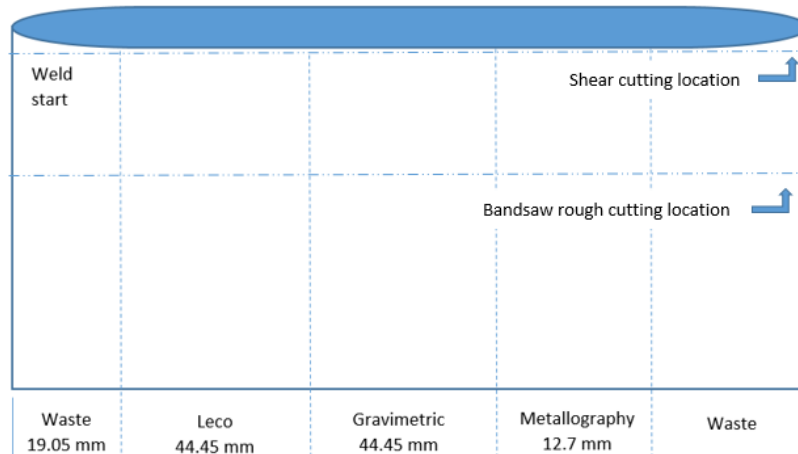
Side view of welded plate specimen indicating the approximate location and size of each sample.
